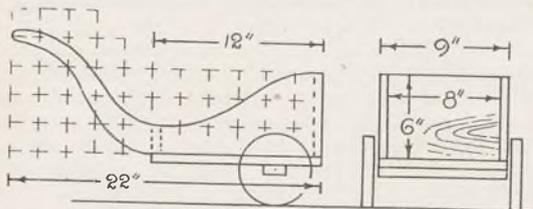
Side and end view of barrow, with outline in 2in. squares
